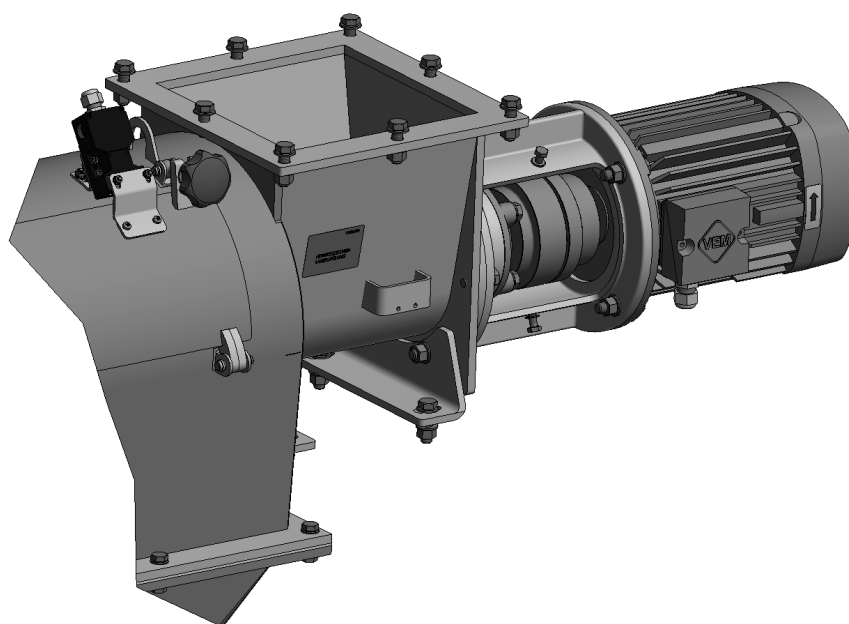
Bearing housing (drive side): Bearing housing without protective plate
